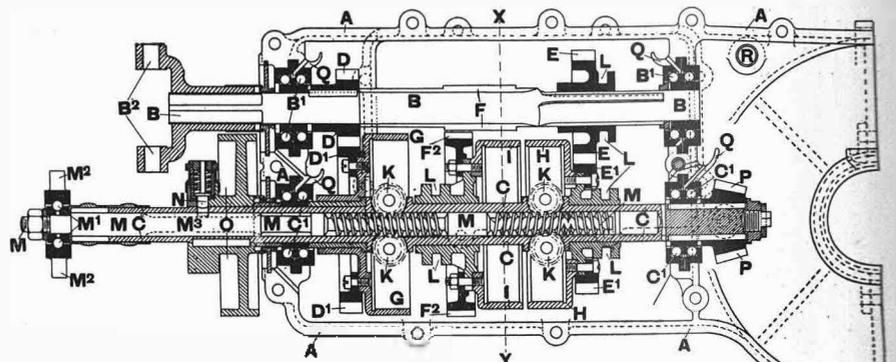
Longitudinal section of the De Dion two-speed and reverse gear.
